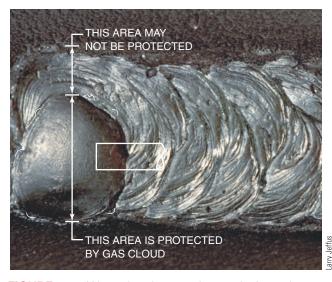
Weave beads more than 2 1/2 times the diameter of the electrode may be nice-looking, but the atmosphere may contaminate the unprotected part of the molten weld pool.
